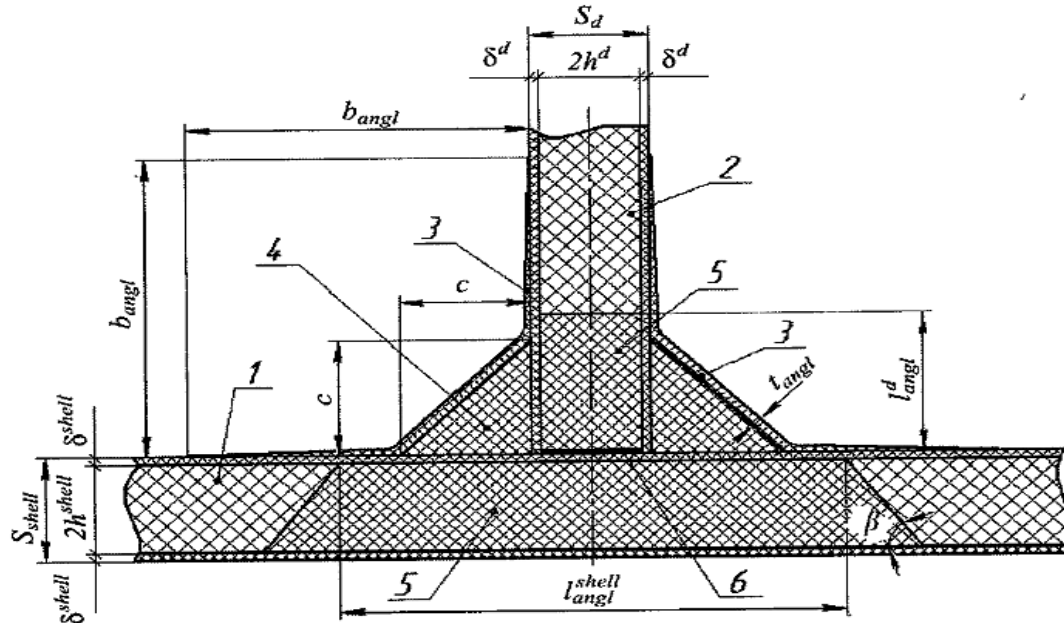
Structural scheme of a moulded fillet joint:
